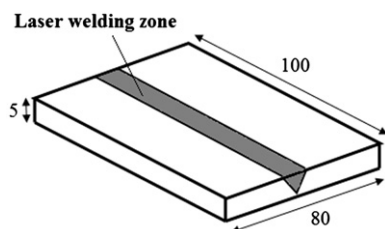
Schematic representation of the laser welding sample (unit: mm).
